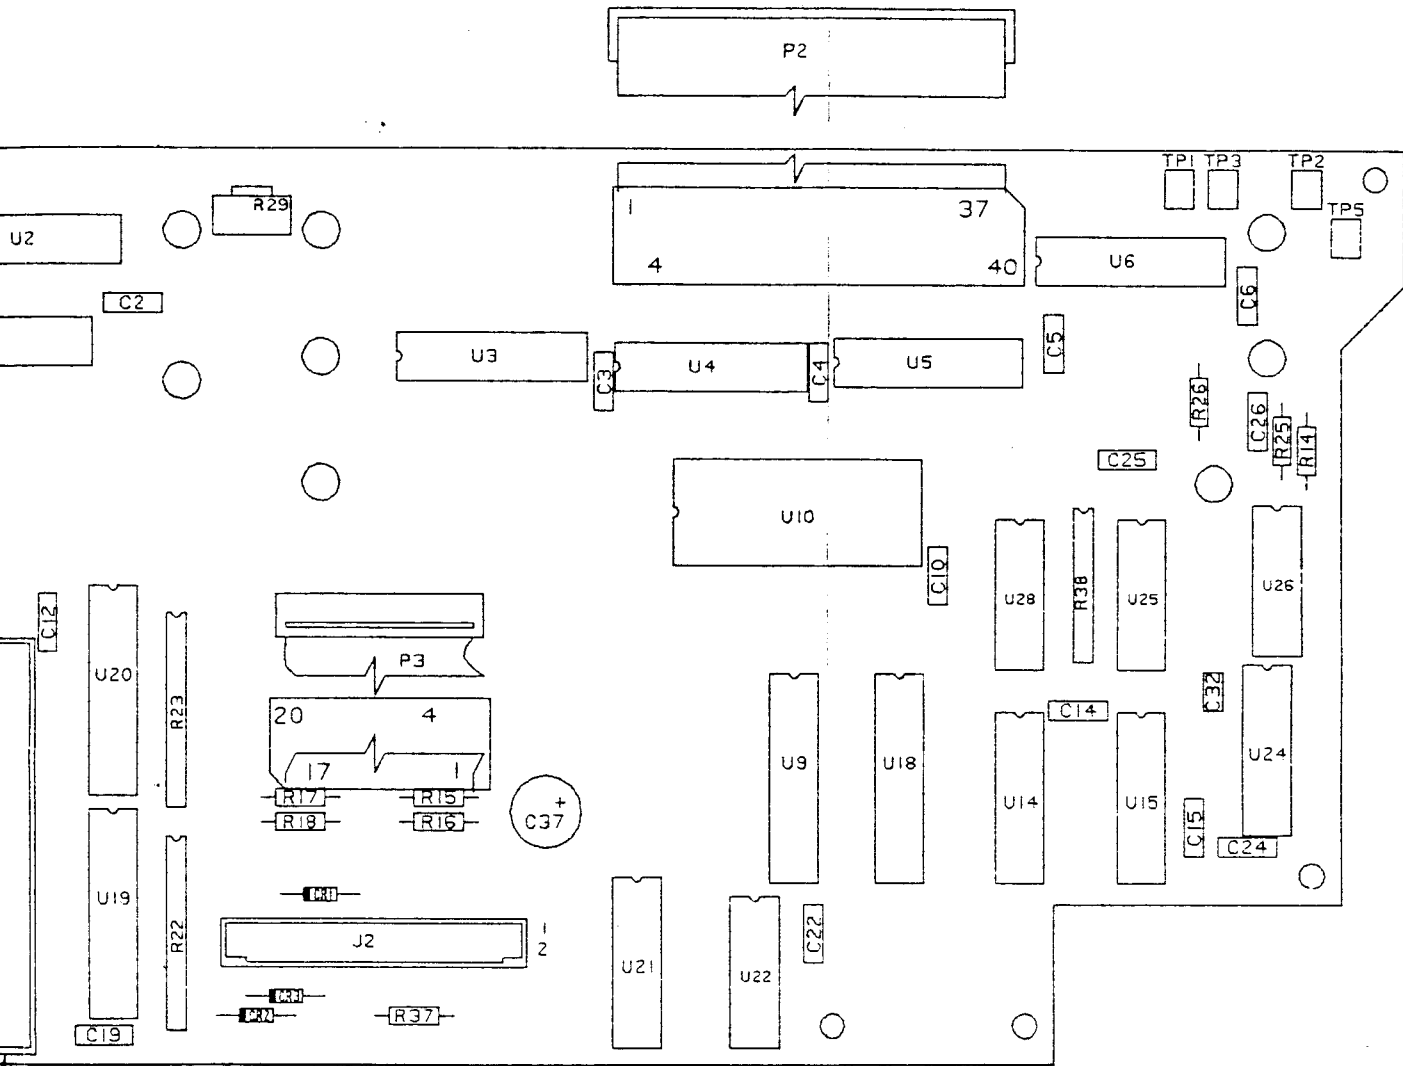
Front Panel Driver Board Assembly A13A2 Component Location Diagram (10073-2200)
